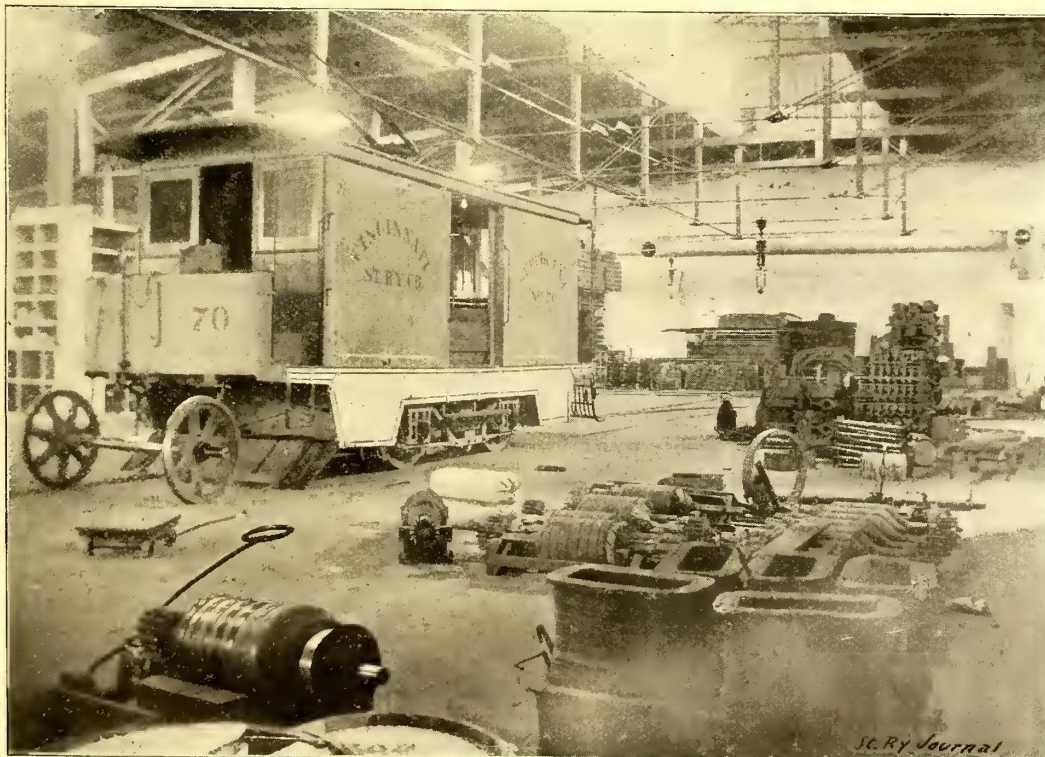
SUPPLY CAR AND SHIPPING ROOM
